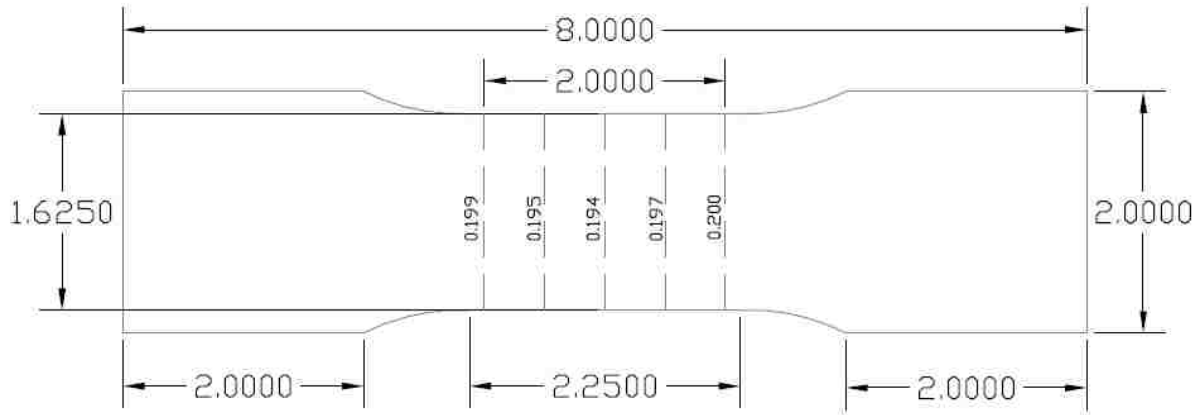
Tension Coupon C2 (all dimensions in inches)
